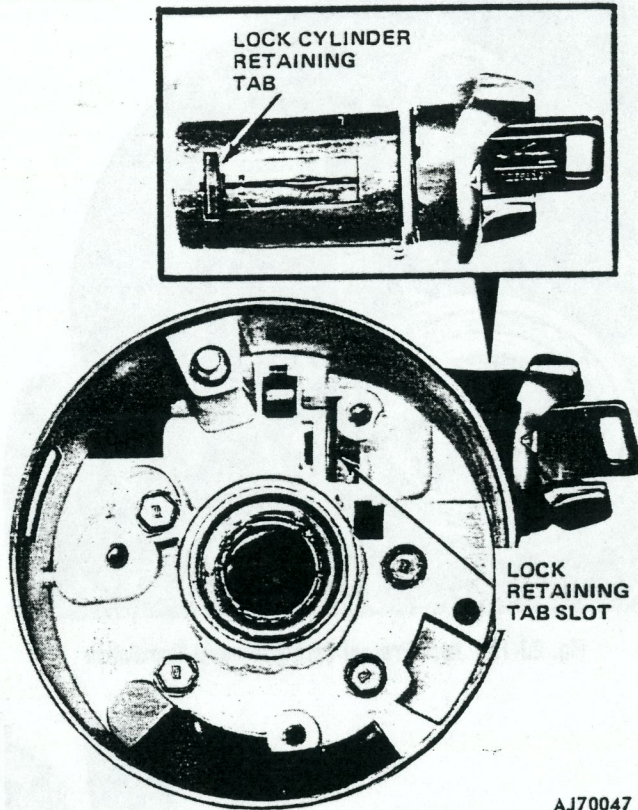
J-9 Lock Cylinder Retaining Tab Location
